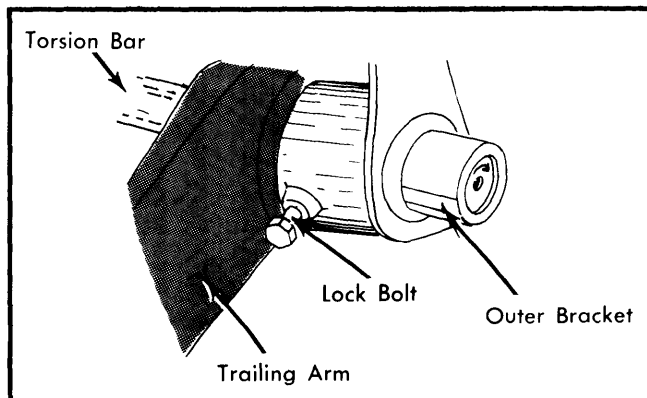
Installed View of Torsion Bar Outer End Attachment
